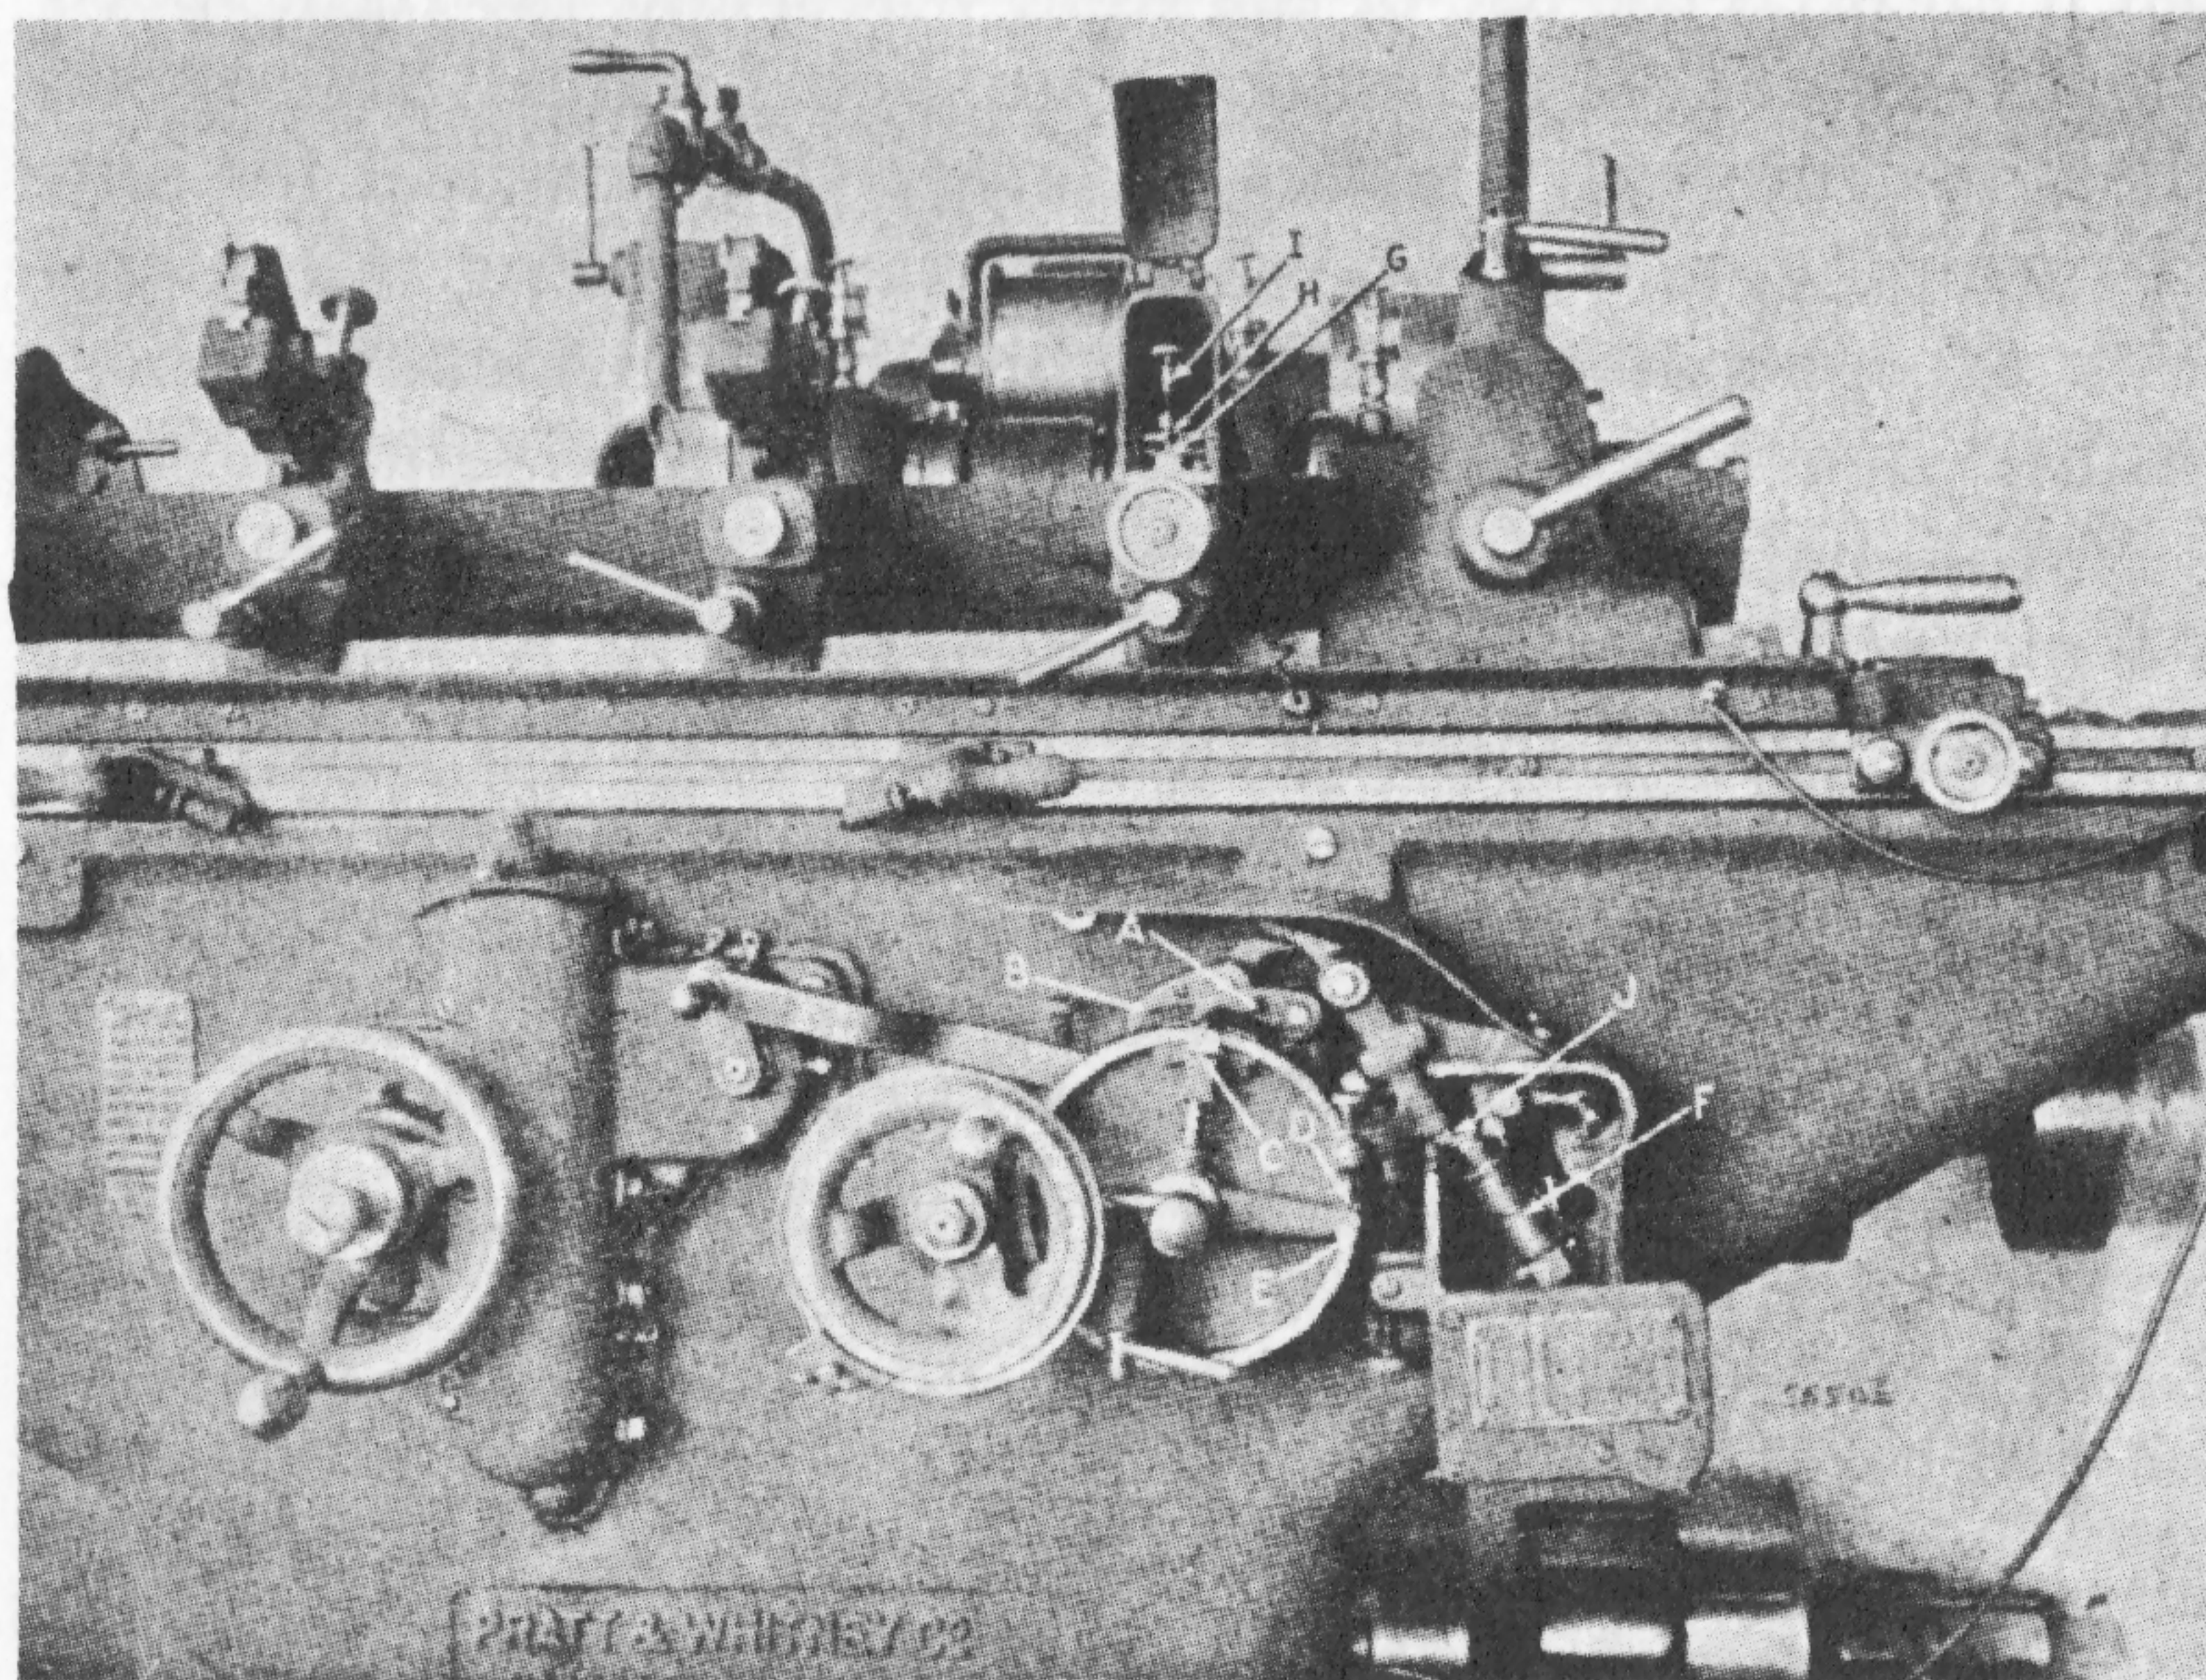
PRATT & WHITNEY AUTOMATIC SIZING GRINDER, 1908
